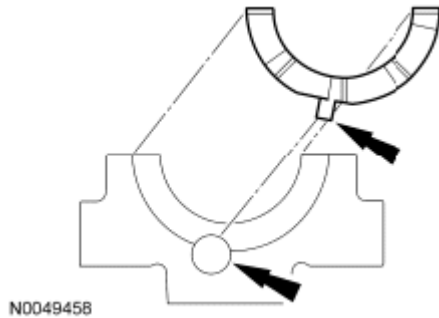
Locating No. 4 Rear Main Bearing Cap
